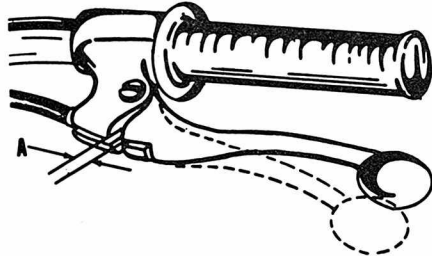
The clutch hand lever free play should be measured at (A).
